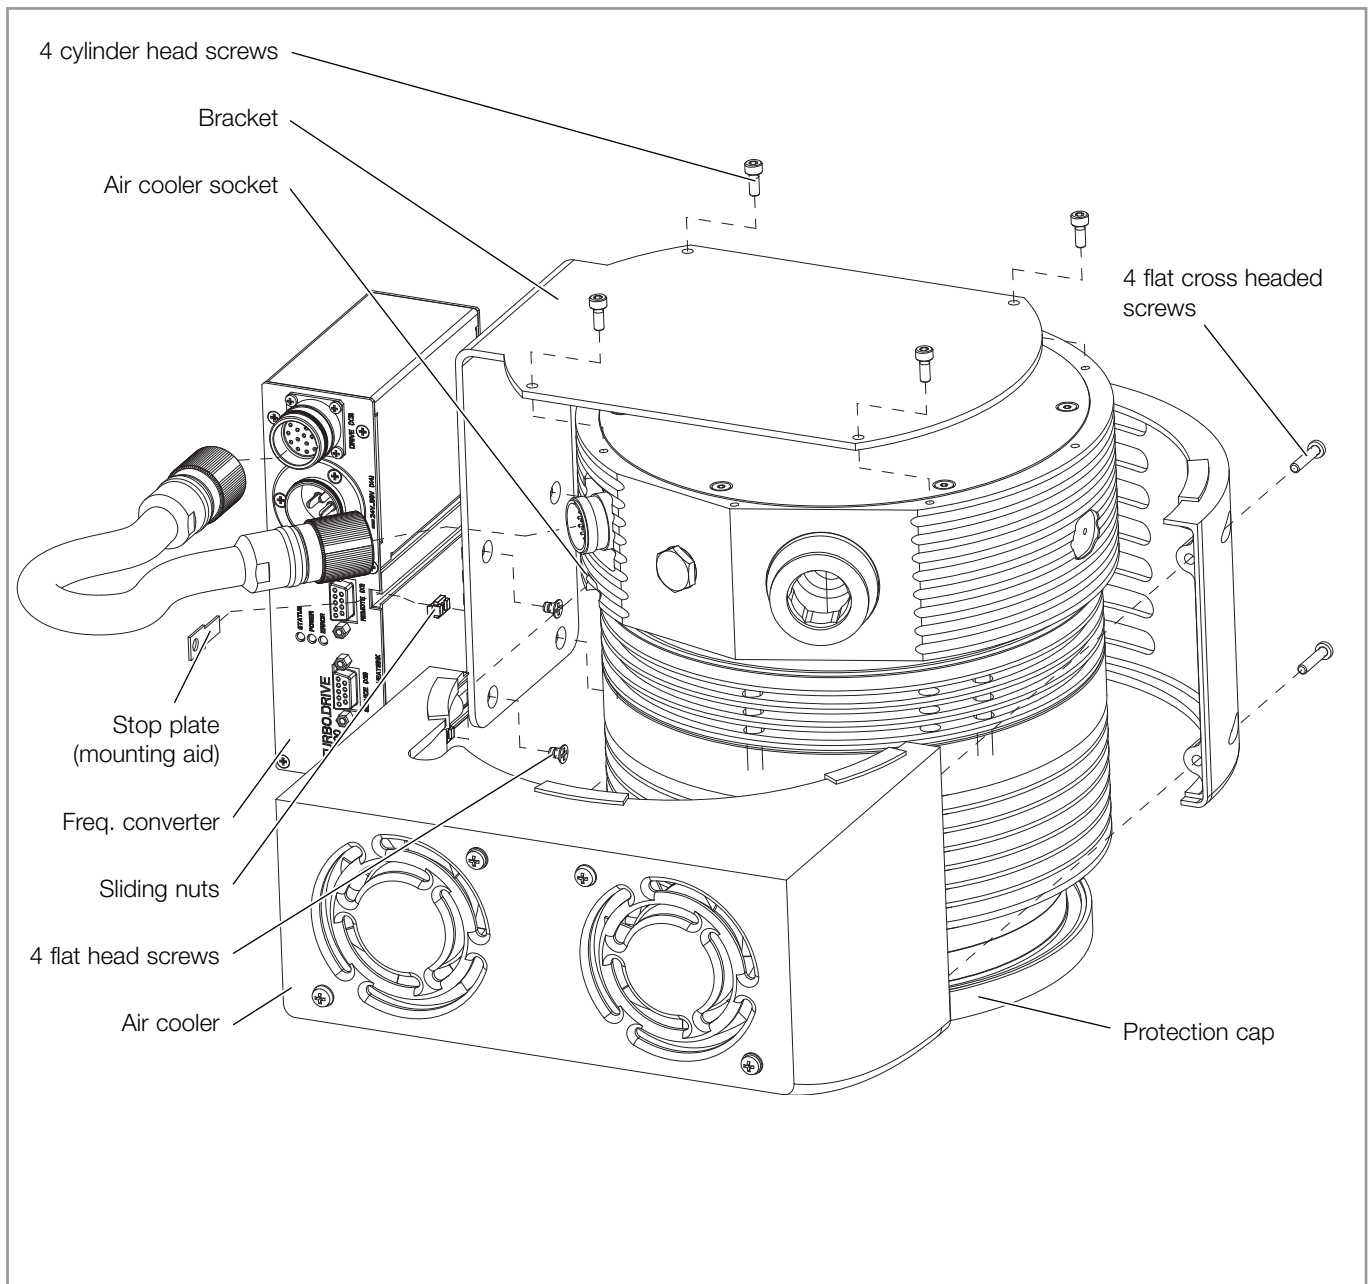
Mounting air cooling and frequency converter beside the pump
